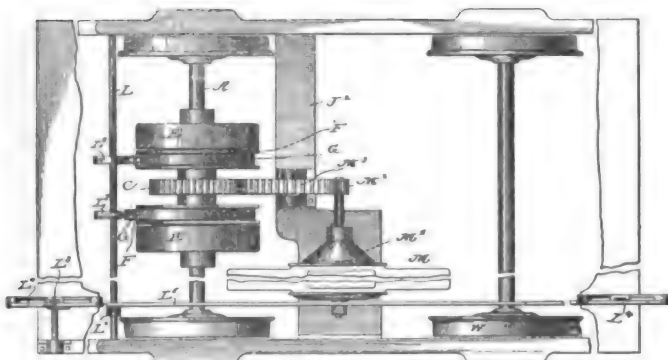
BELDING'S ELECTRIC CAR GEAR.
